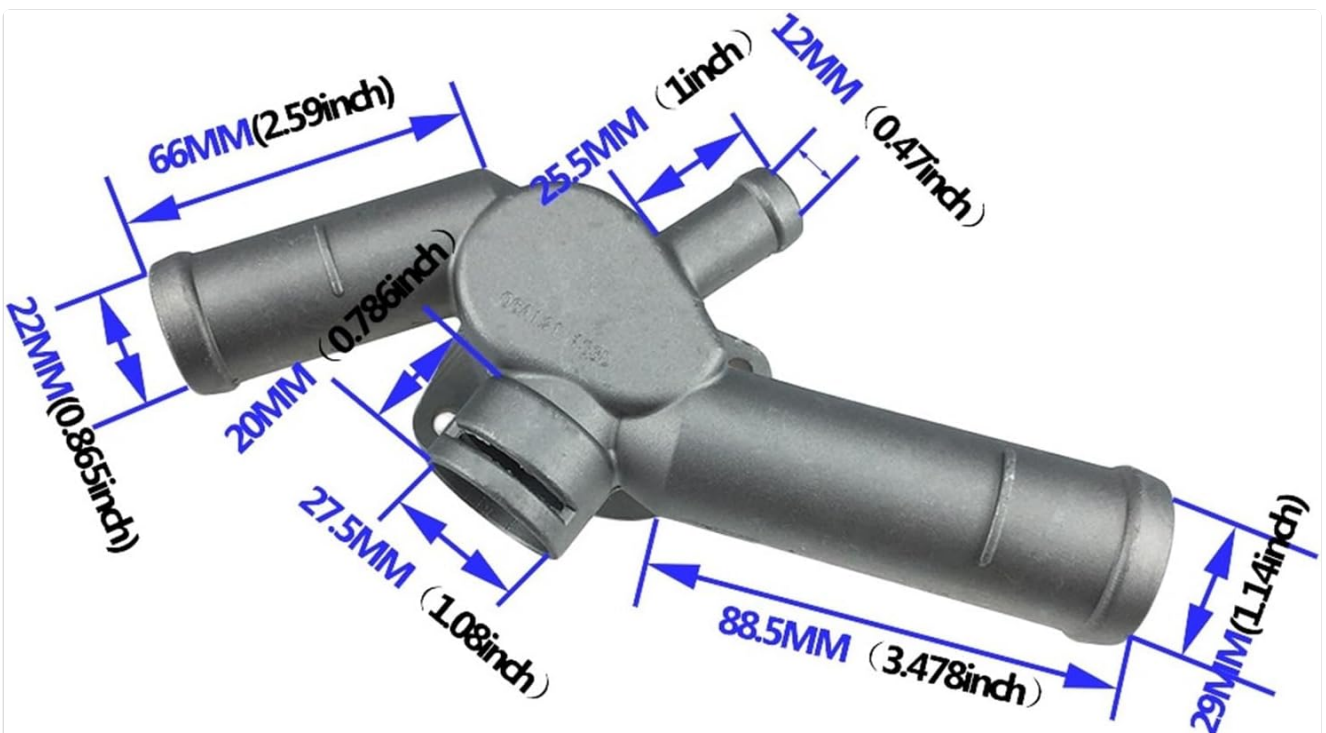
Detailed dimensions of the thermostat housing coolant pipe. This view provides measurements for various connection points and overall length, crucial for fitment verification.
